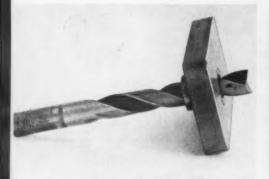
Illustration showing drill ground to a "fishtail" point inserted in drill bushing of jig block used for guiding purposes.
